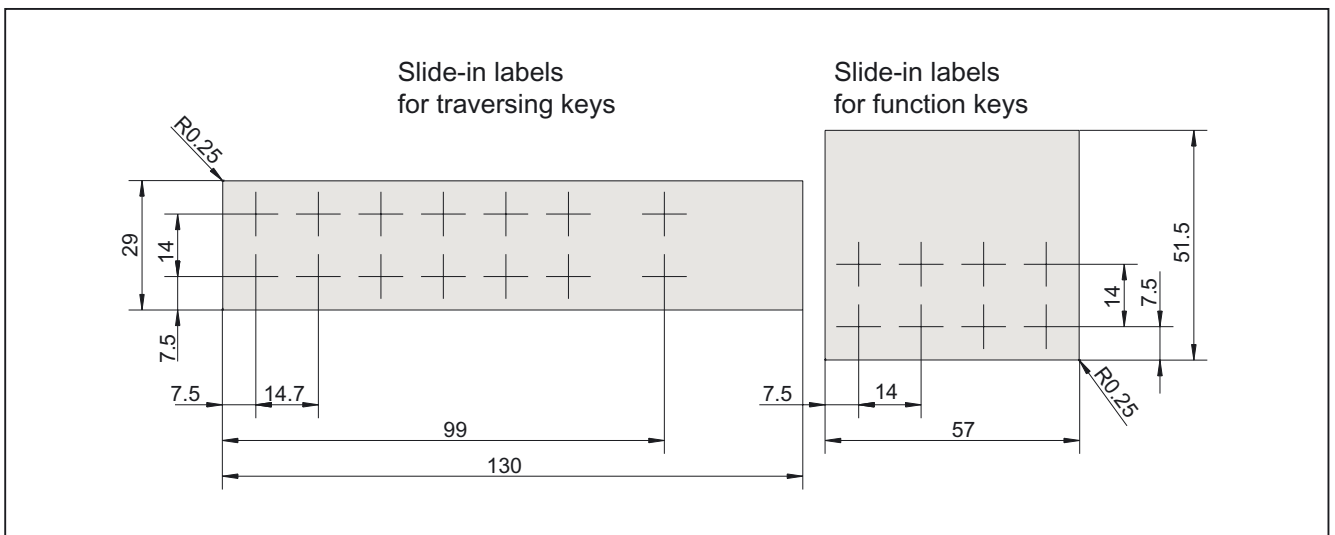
Dimensional drawing for labeling the slide-in labels
